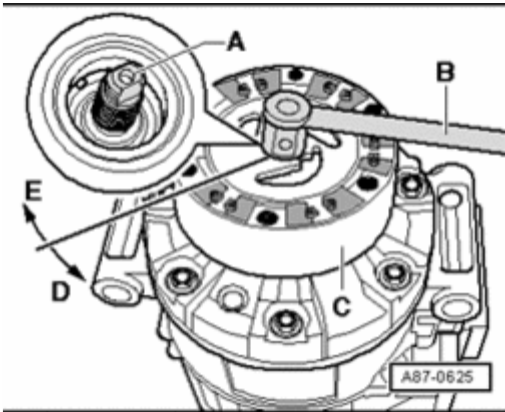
Loosening Drive Plate & Providing Support For Compressor Shaft By Applying Counterhold To Compressor Shaft
